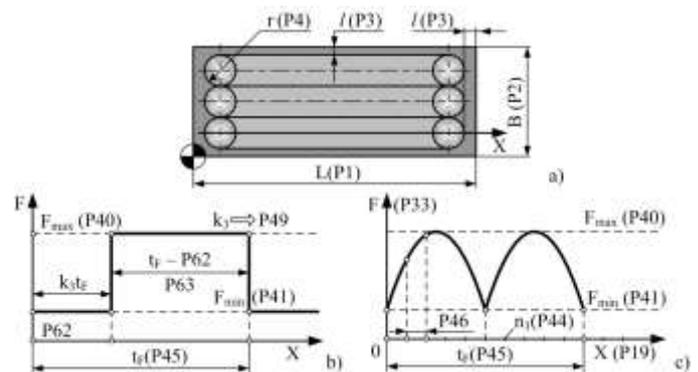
SPD machining of surfaces according to program "Meander" with intermittent feed: a is machining pattern; b, c are step and alternating rules of changing feed along axis  $X$
